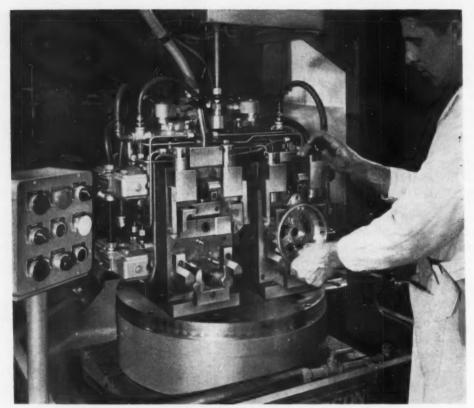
When loading a part, the operator hooks the casting over the two lower clamp fingers and lowers the damping jacks with the black knobs. By pressing the cycle button on the control box to the left, he locks up the velvet-glove clamp and starts the machine sequence.
